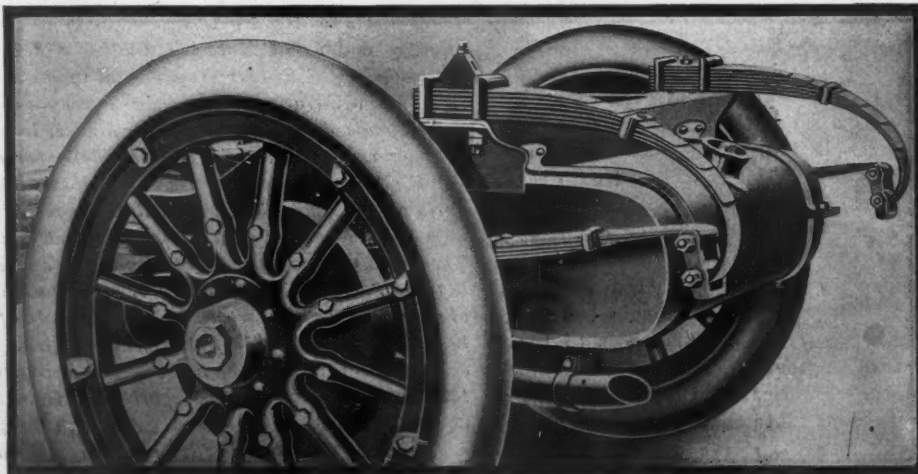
THREE-QUARTER SPRING CONSTRUCTION ON STEARNS CHASSIS
